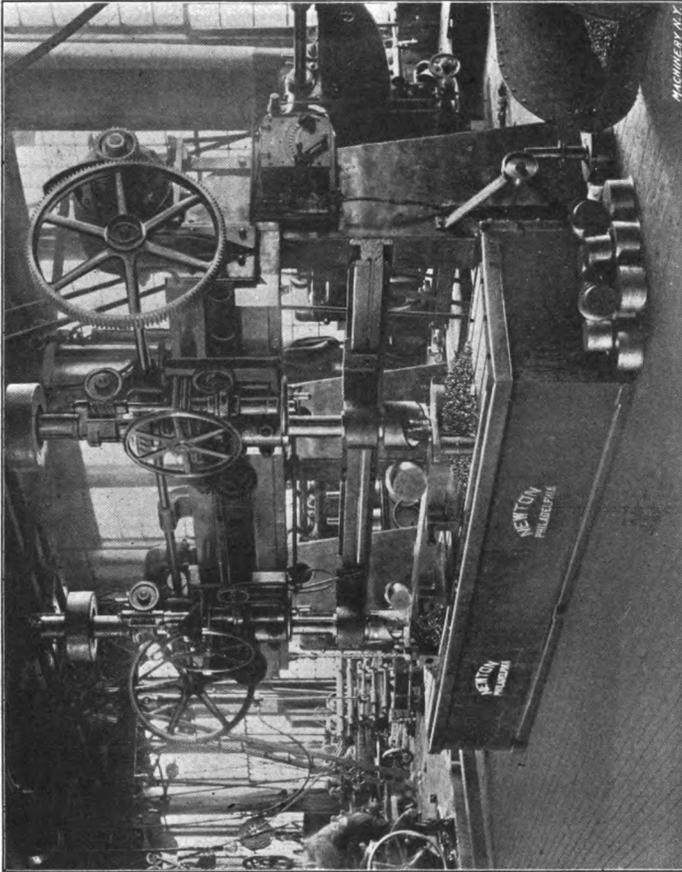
Cutting the Crank-pin and Knuckle-pin Holes in the End Rod in a Double-spindle Newton Boring Machine
